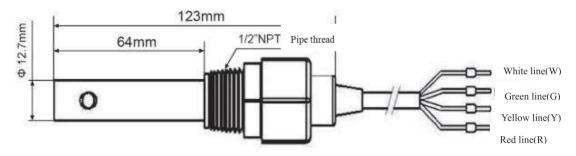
C=0. 1 (cm⁻¹) CON3133-13 Stainless steel CELL external dimension
